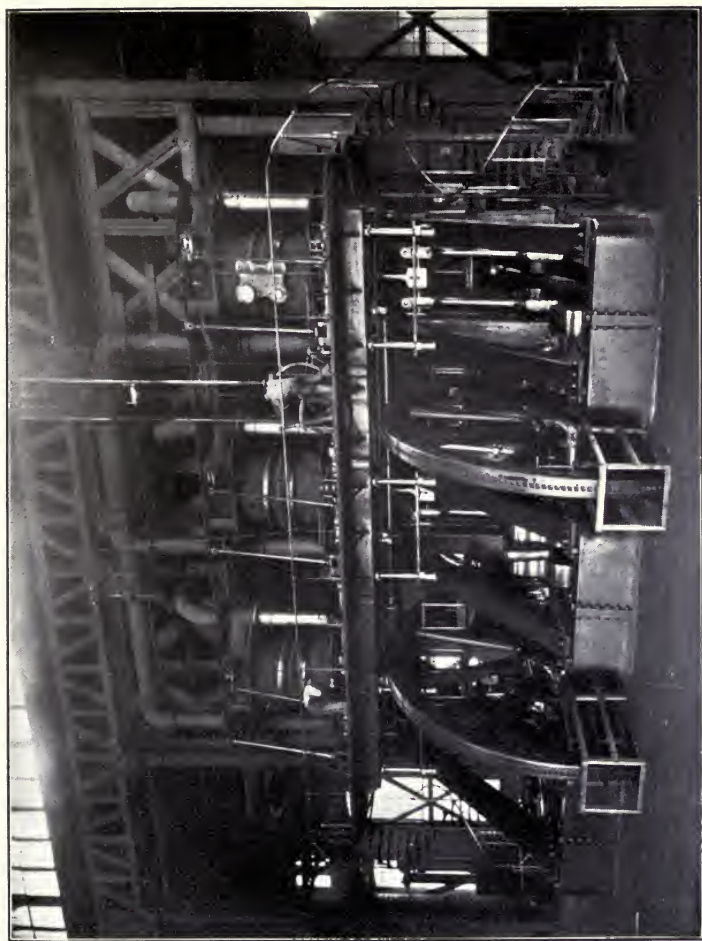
ENGINE FURNISHING 15,000 HORSE-POWER FOR HYDRAULIC FORGING PRESS, BETHLEHEM IRON COMPANY. THREE CYLINDERS, EACH FIFTY INCHES IN DIAMETER AND NINETY INCH STROKE. DESIGNED BY E. D. LEAVITT AND BUILT BY THE WM. CRAMP SHIP AND ENGINE BUILDING COMPANY.
